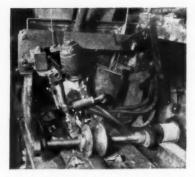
Close-up of the dual head set-up for applying two fillet welds simultaneously.
